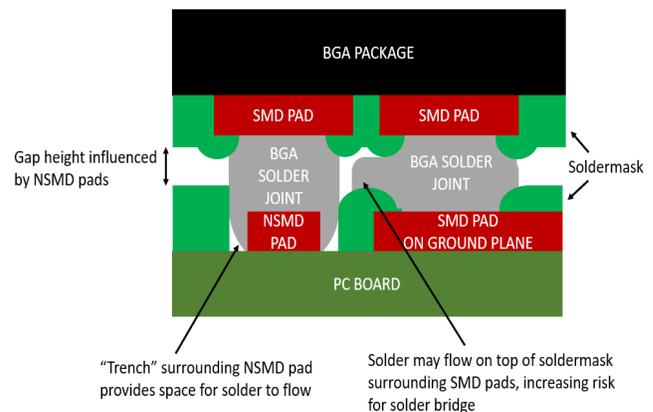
Combination of SMD and NSMD pads, especially at package corners may create a potential for solder bridging.
